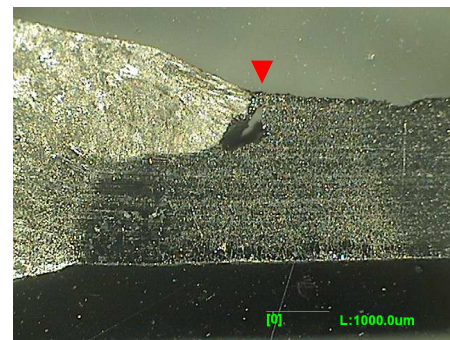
OM images showing a typical defect formed during butt welding in No 1 weldment.
